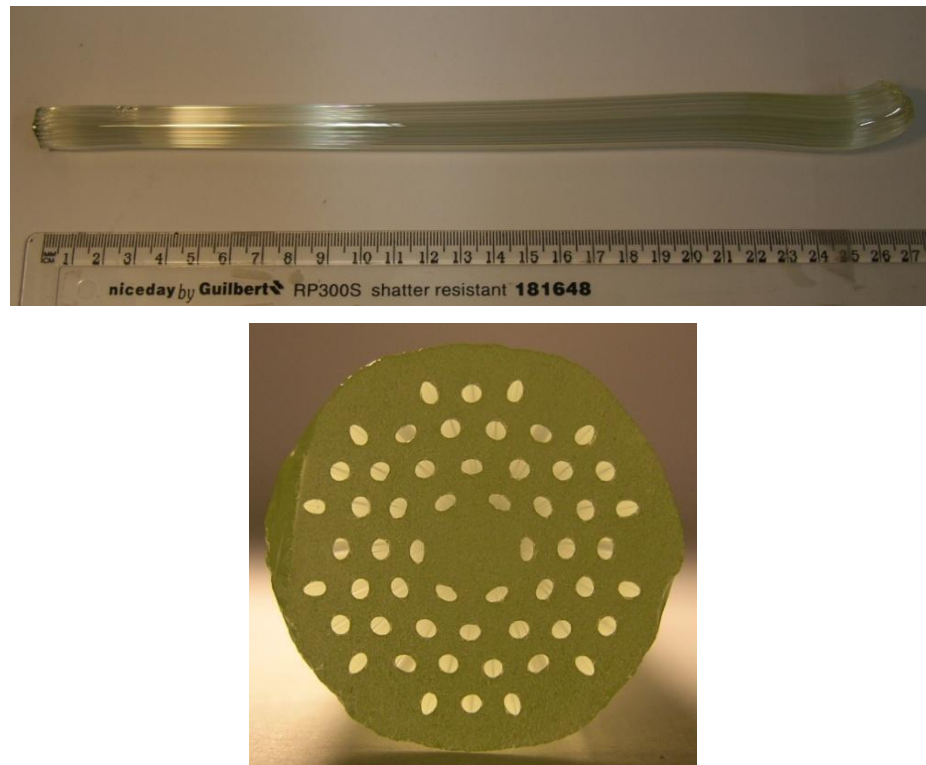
Side view (top) and end cross-section (bottom) of a LMA preform fabricated using the TZNL glass and a larger d/Λ in the preform die.
